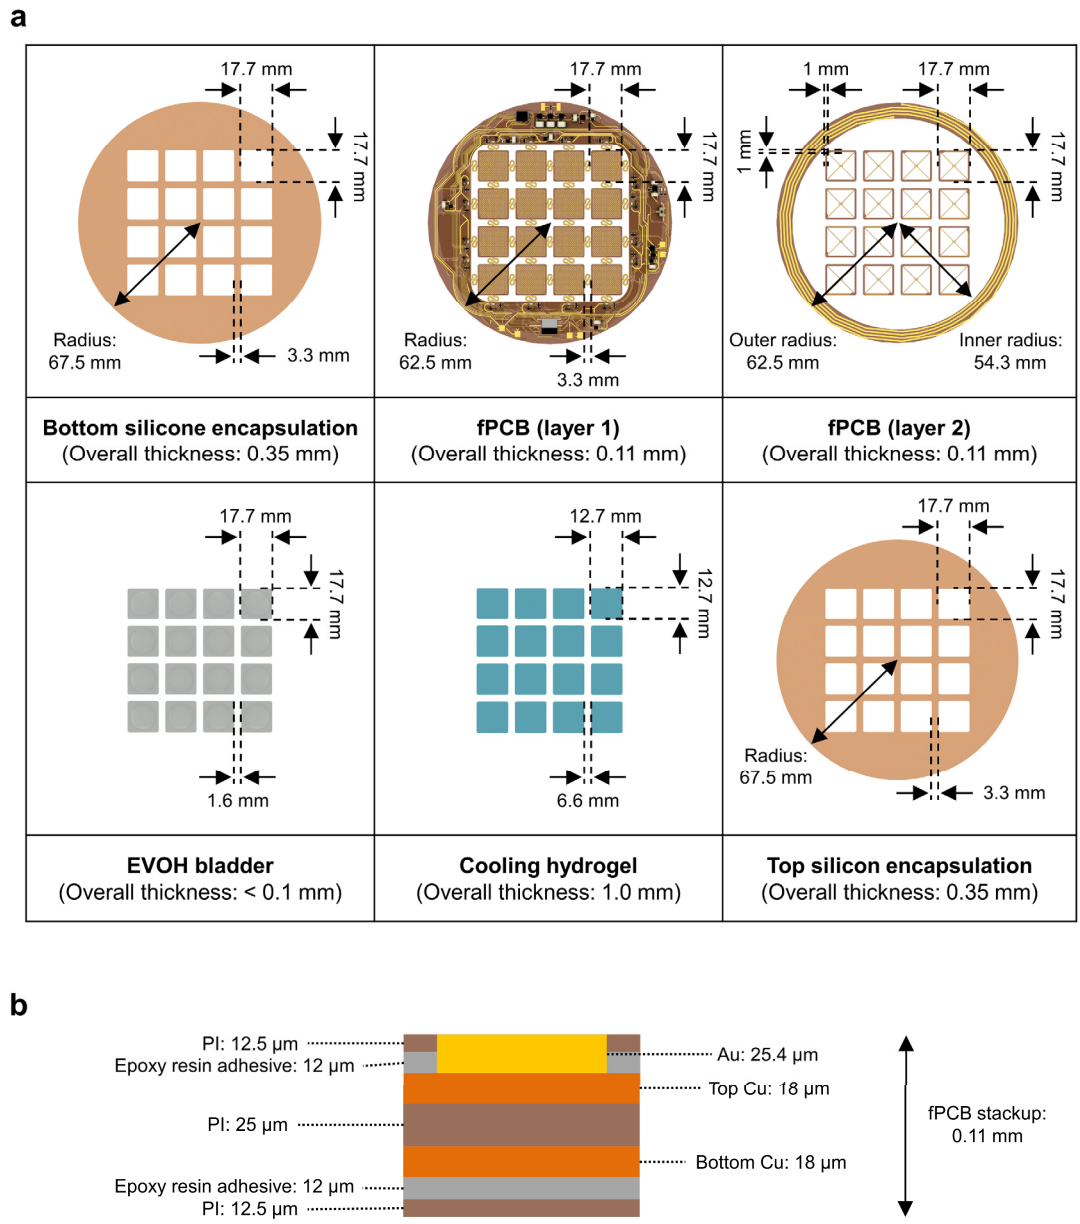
(a) Design and dimensions of each layer in t-eVR system. (b) Structure of fPCB stackup.
